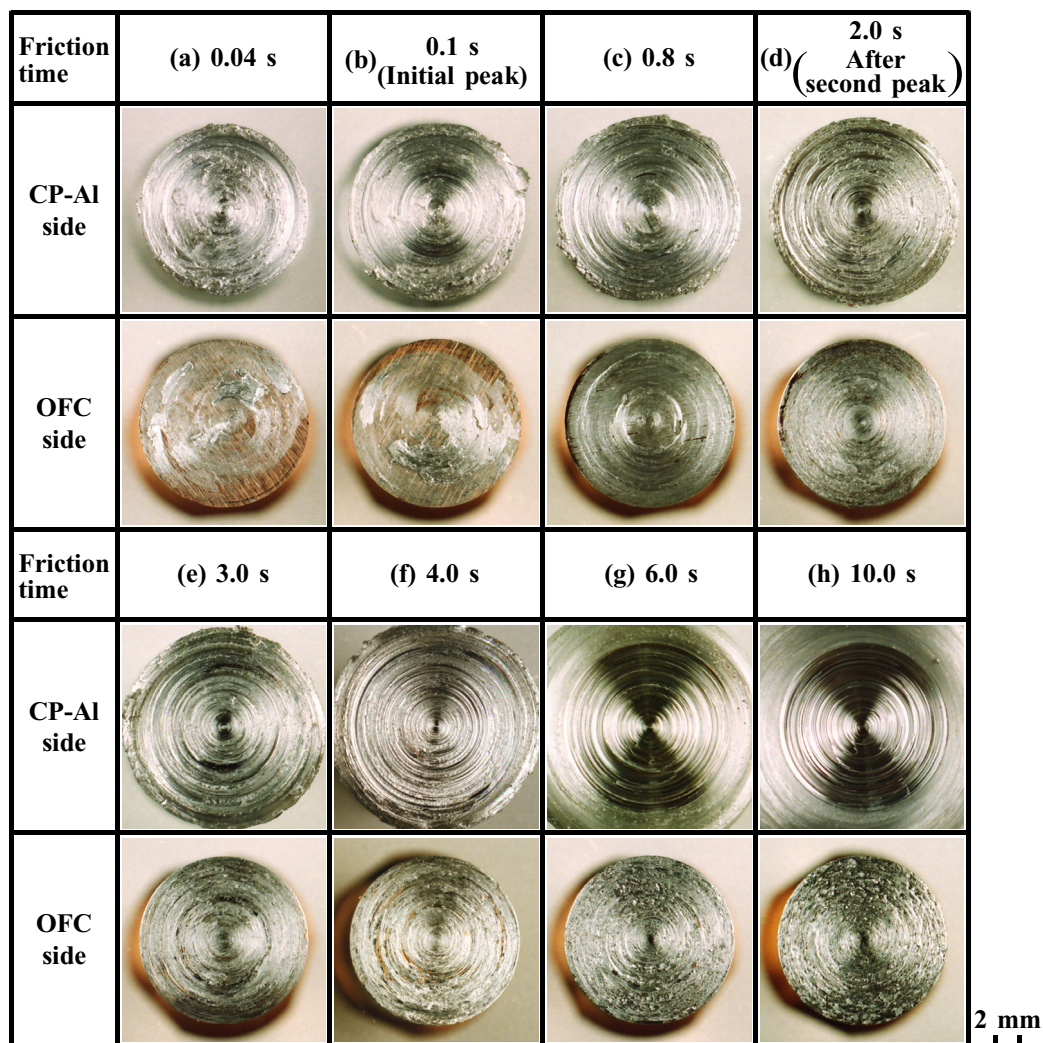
Appearances of weld interfaces after welding at various friction times.
